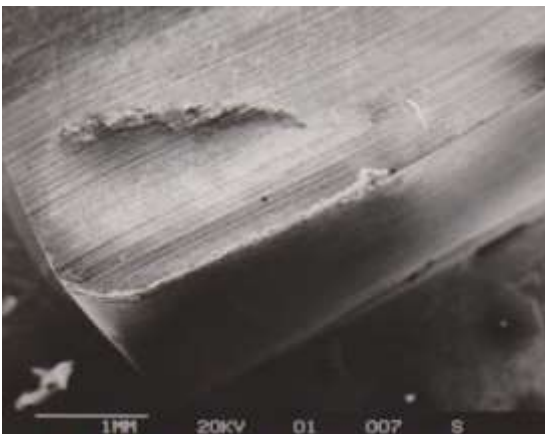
The SEM picture of the TiN coated HSS tool after steel cutting
